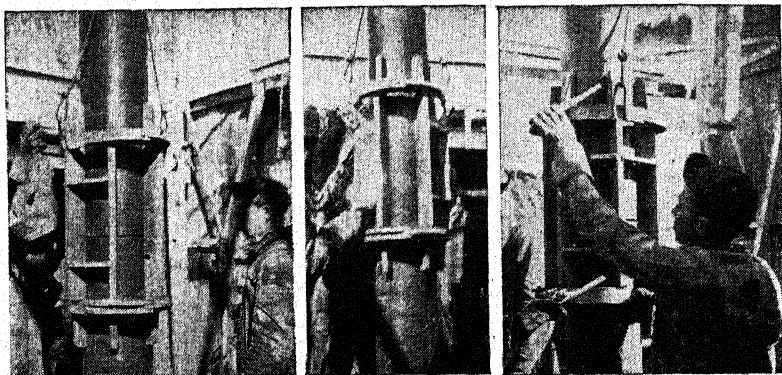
Left—Aligning clamp in place. Fig. 5. Center—Tack welding joint with aligning clamp in place. Fig. 6. Right—Removing aligning clamp after tacking.
